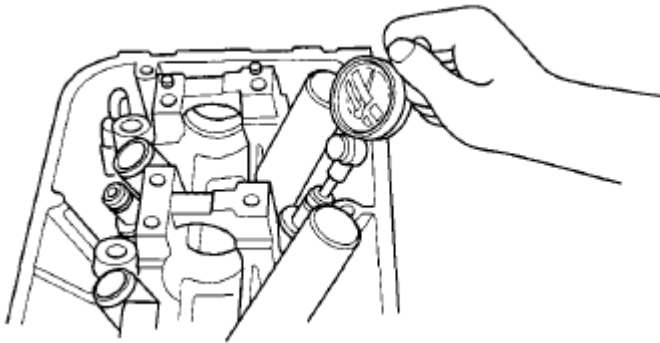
Checking Intake Valve Stem-To-Guide Clearance
